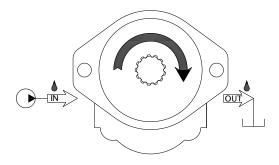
Motor Rotation as Viewed From Shaft End
